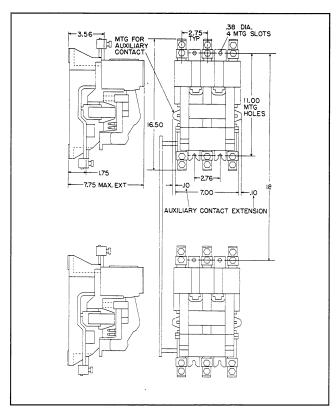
A251 Dimension Drawing (Dim. in inches)
